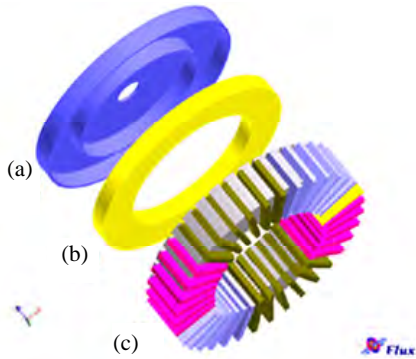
Different parts of axial flux hysteresis motor. (1) Holder; (2) Hysteresis ring; (3) Stator and winding
